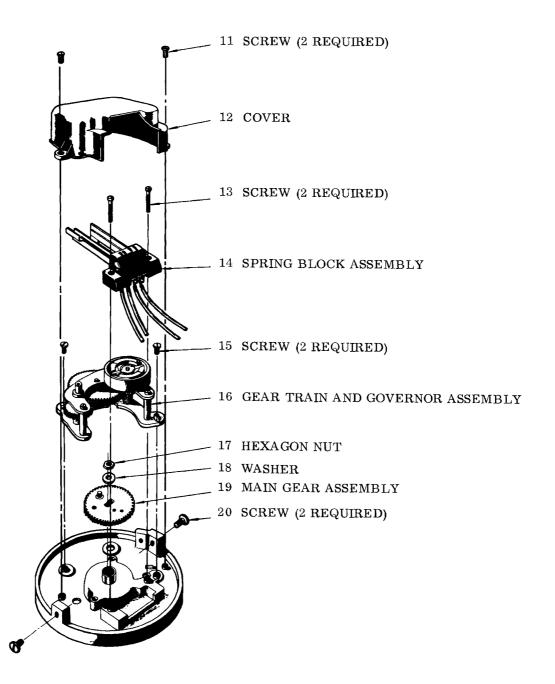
No. 7 Dial, Parts Breakdown (Rear View).
